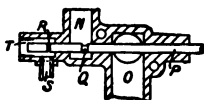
Roots' Improved Oil Feeding Device for Explosive Engines (Vertical Section).
